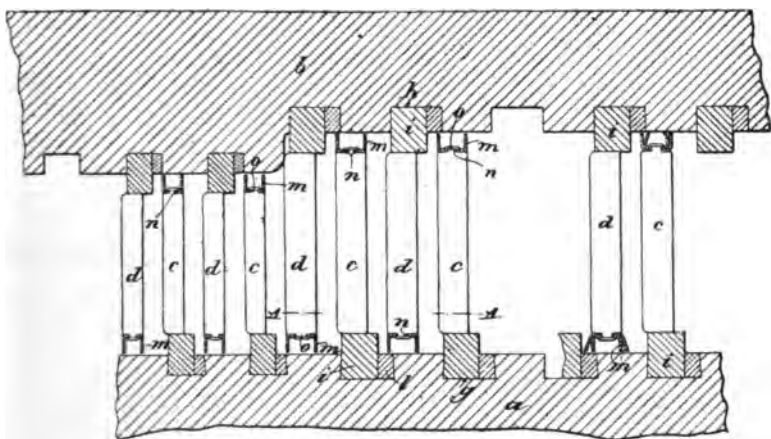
Longitudinal Section of part of Drum and Casing,
